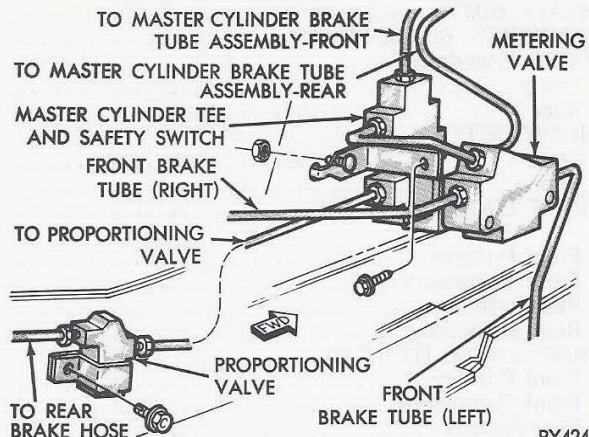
Metering Valve Mounting (Satellite Models)
